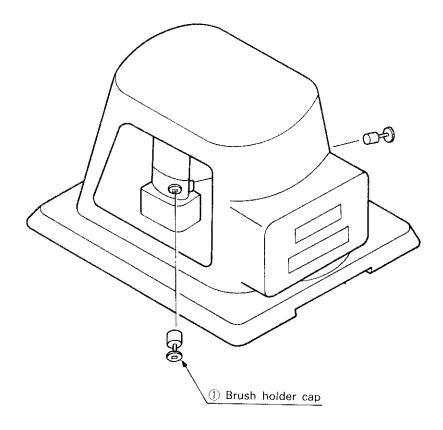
Checking and Replacing the Waist Drive Motor Brushes
